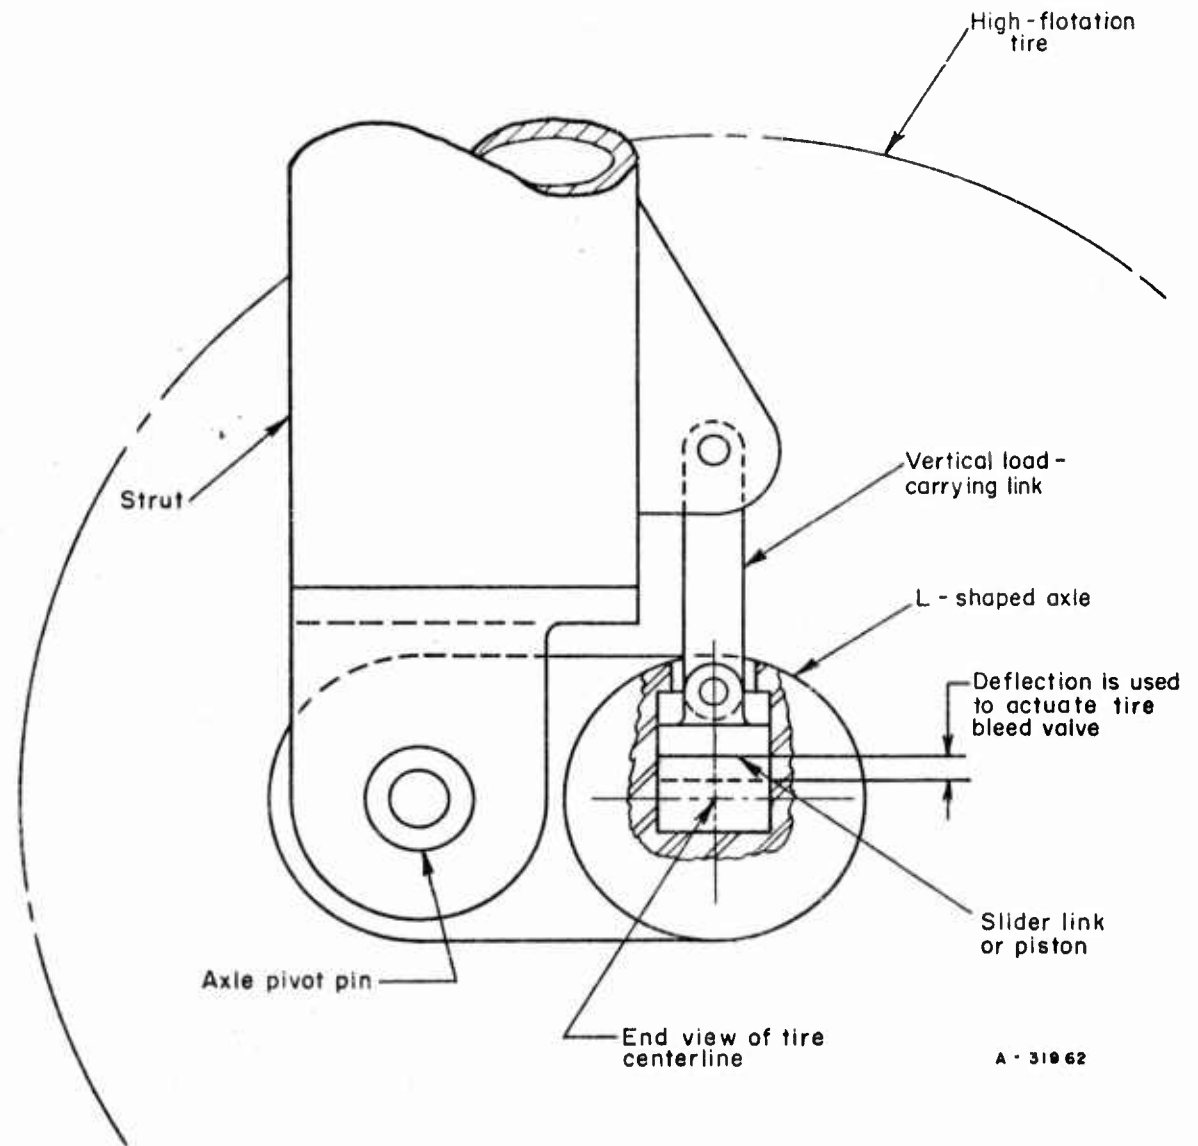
SCHEMATIC DRAWING OF THE MOUNTING LINKAGE OF THE 1500-POUND LANDING-GEAR UNIT
